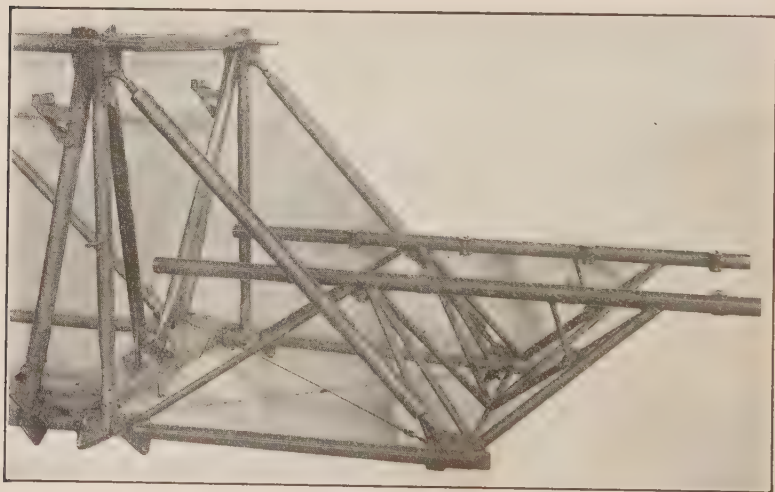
Engine mount for V engine. (*Courtesy Curtiss Aeroplane & Motor Co., Inc.*)
